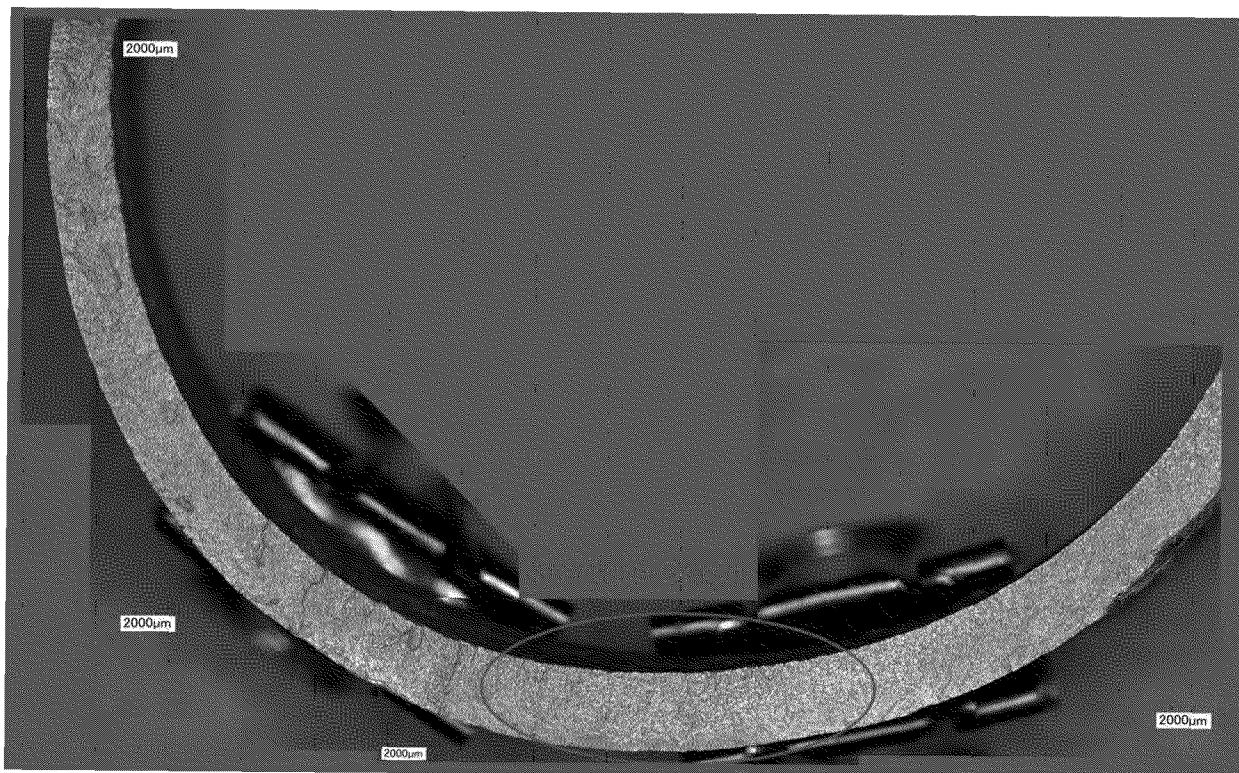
Optical microscope photo montage that shows the fracture surface with the origin indicated.
